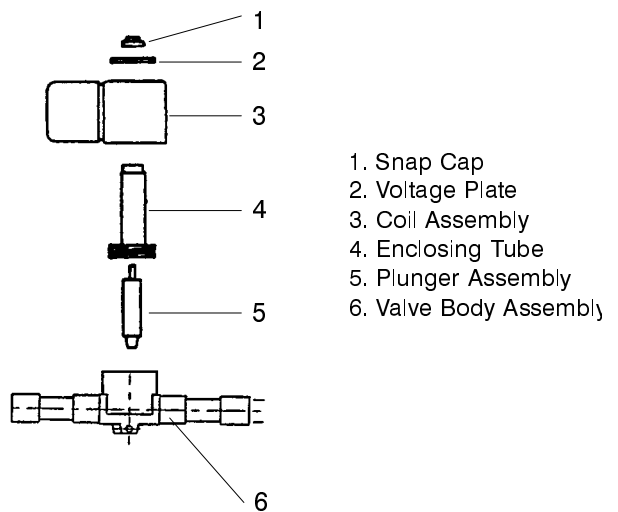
Hot gas (two-way) solenoid or Condenser closing solenoid (Two-Way)
